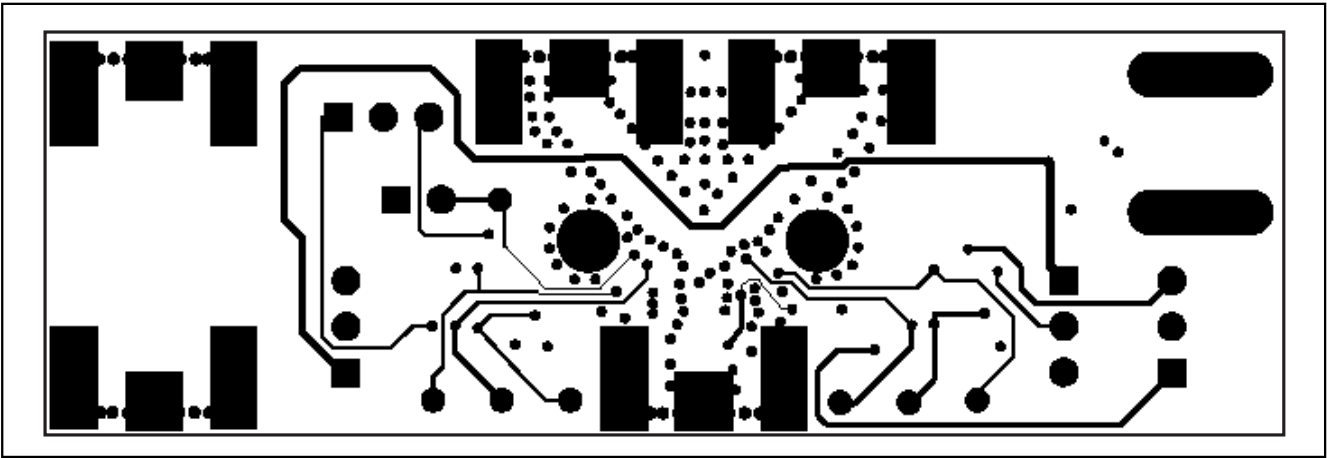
MAX3934 EV Kit PC Board Layout—Solder Side
